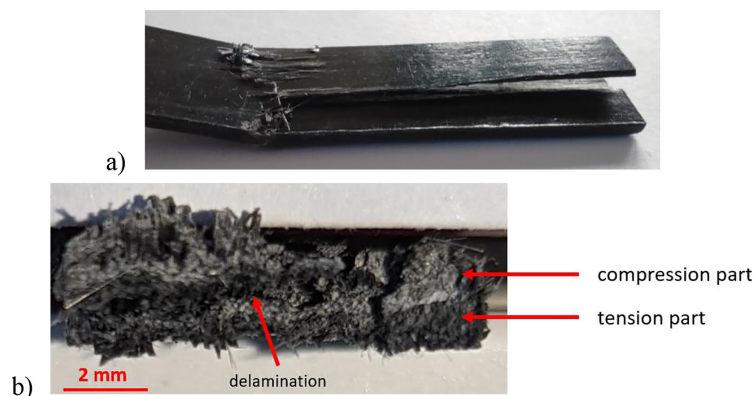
View of the fracture surface of the specimen (PP + GF) impact-bent (a) general view (b) view after additional breaking
